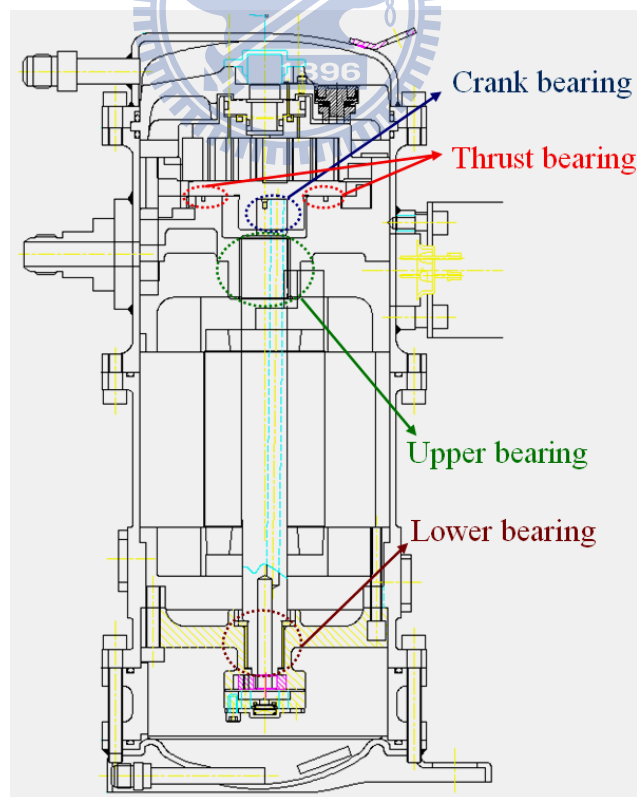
Schematic of the three journal bearings and the thrust bearing
